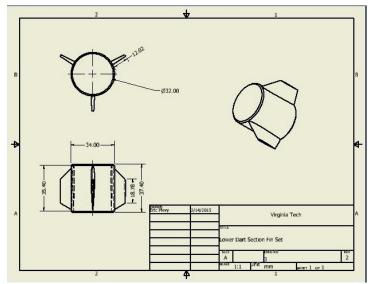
Views and drawings of the lower section of the dart fin assembly.
